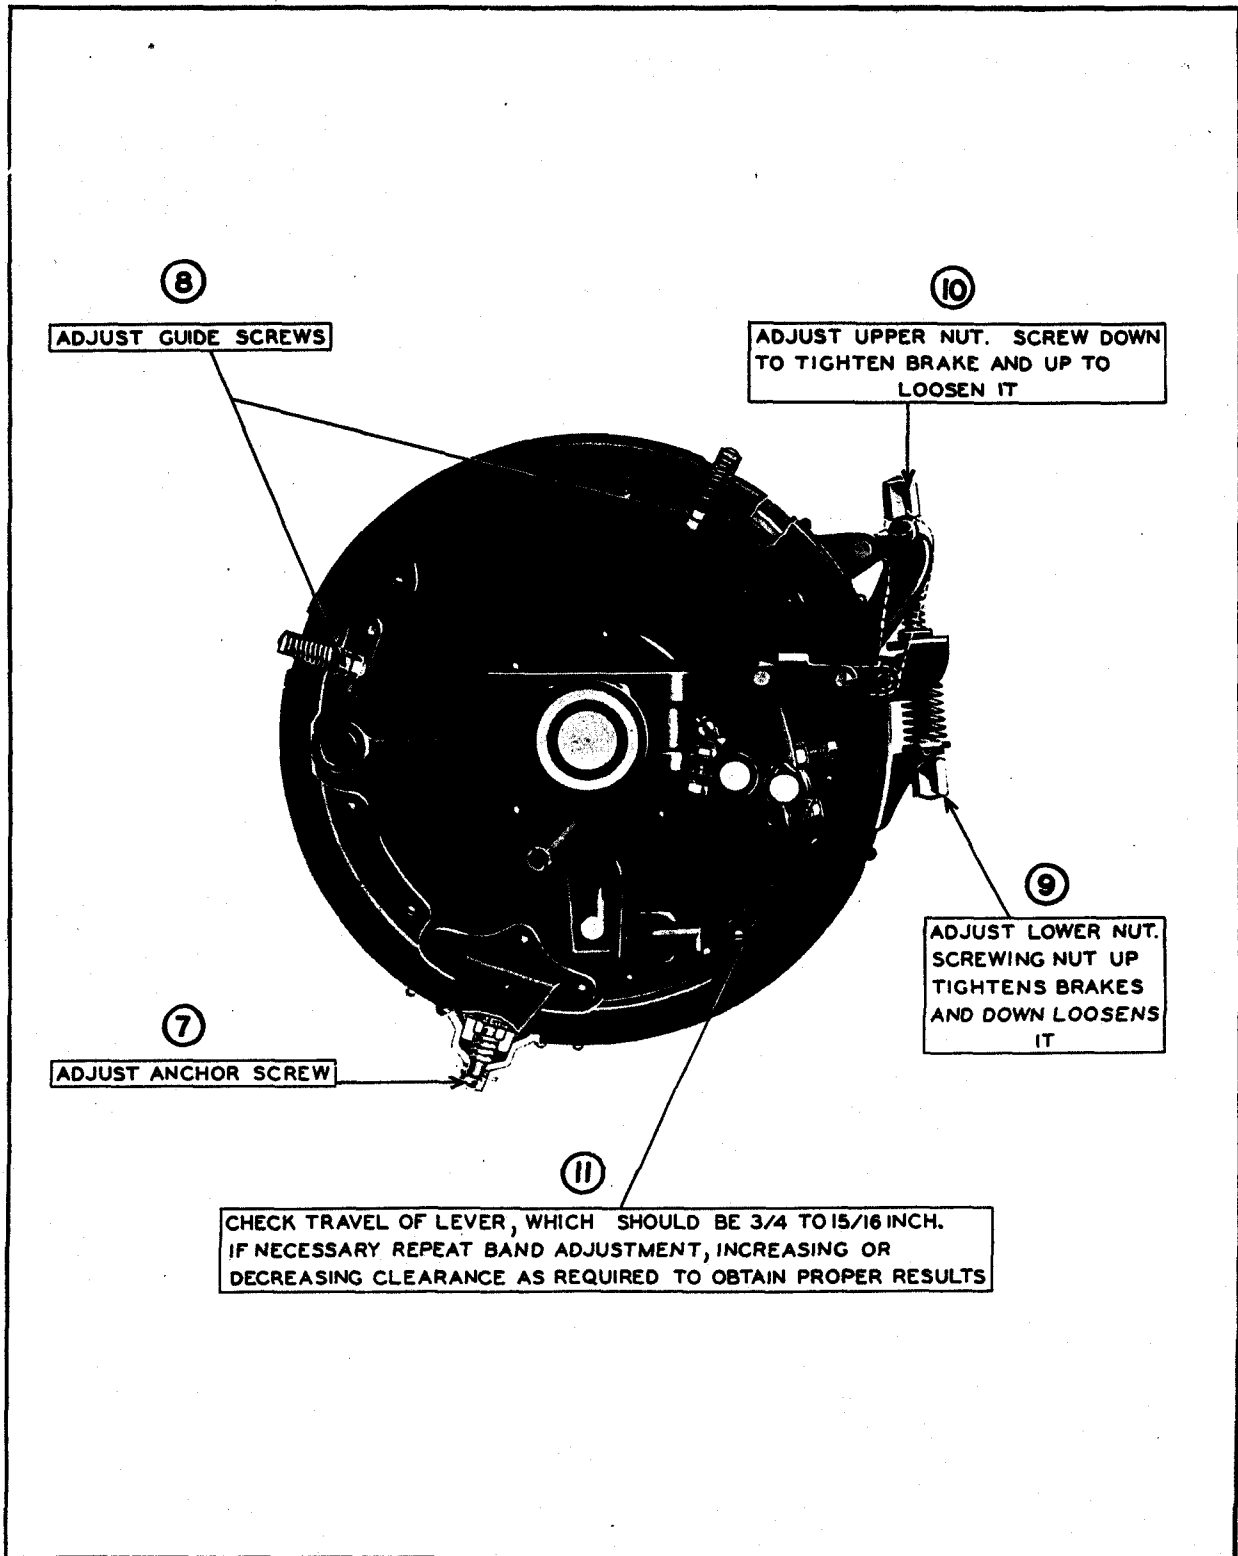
Adjustment of Rear Foot Brakes. Clearance between Lining and Drum, .035 inch
